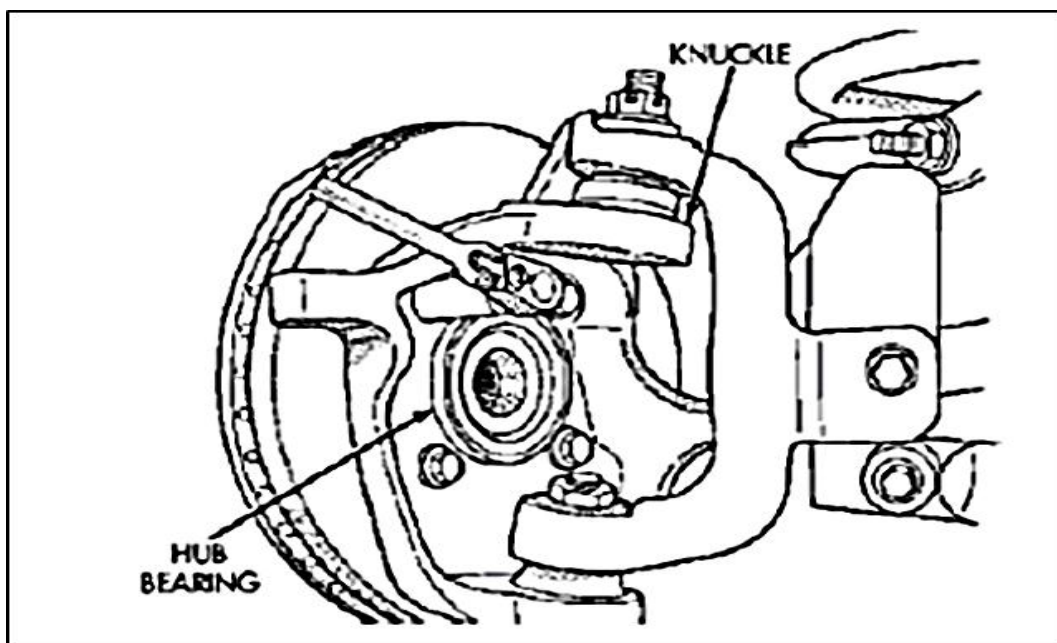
Steering Knuckle with the Wheel Hub (B.Babu, 2014).
